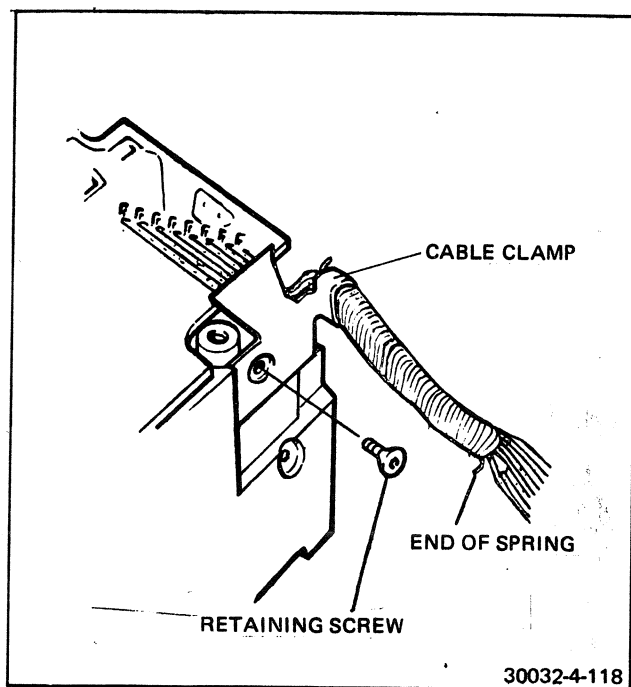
MULTI-WIRE CABLE CLAMP
